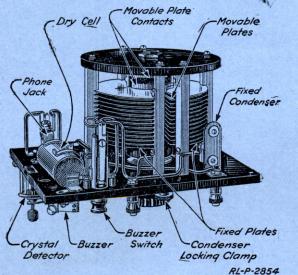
Panel of set box BC-37 removed to show interior parts.
